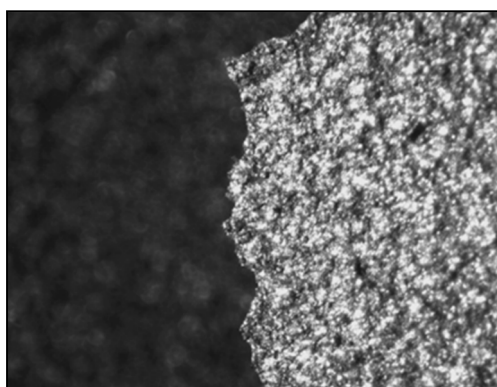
Fracture profile of 3D printed Ti-6Al-4V specimens (x40) after tensile test.
